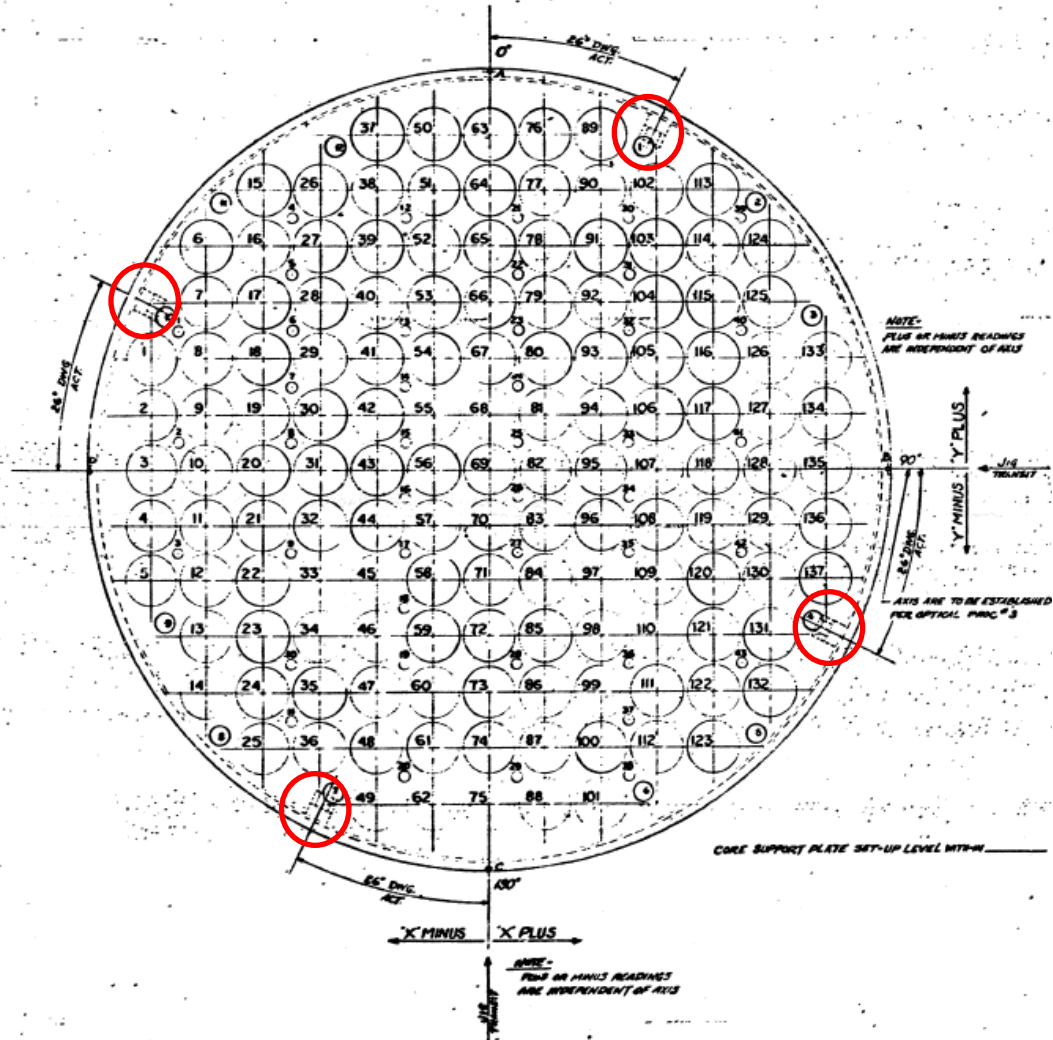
Aligner Pin and Bracket Assembly Locations [12]
